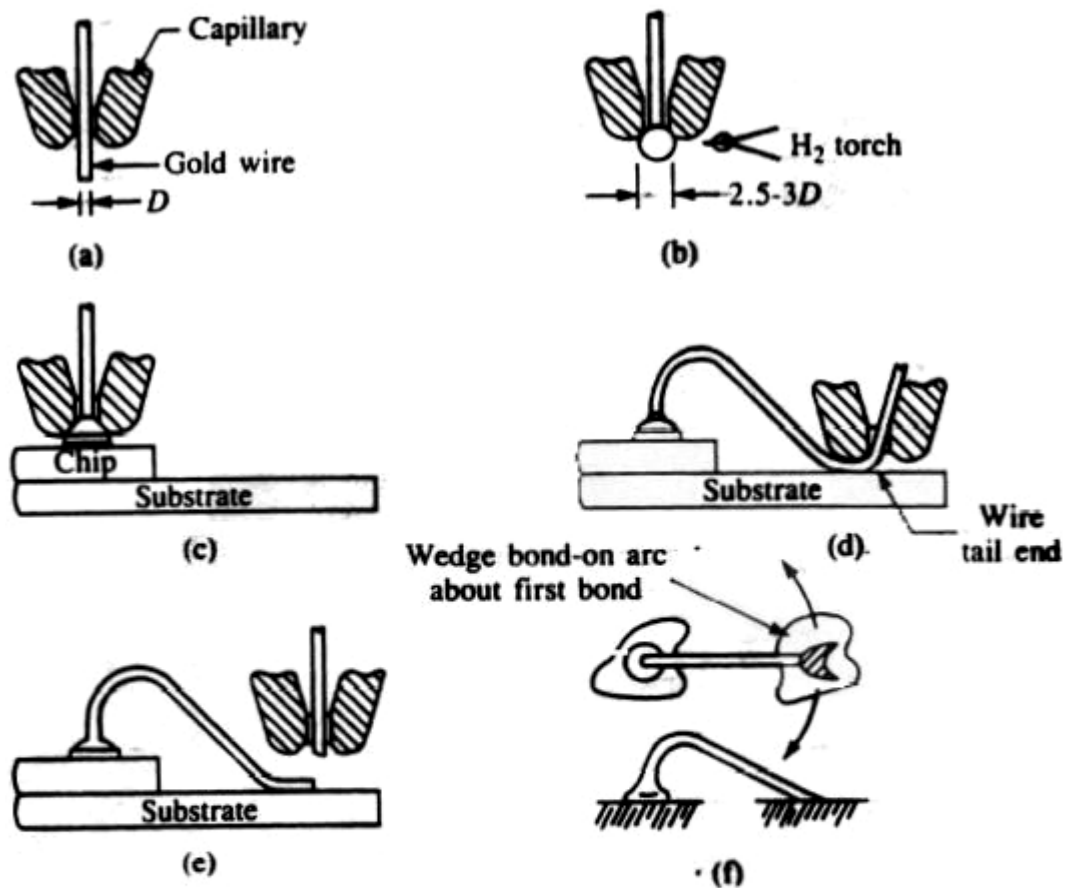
Thermosonic Ball-Wedge Bonding of a Gold Wire
